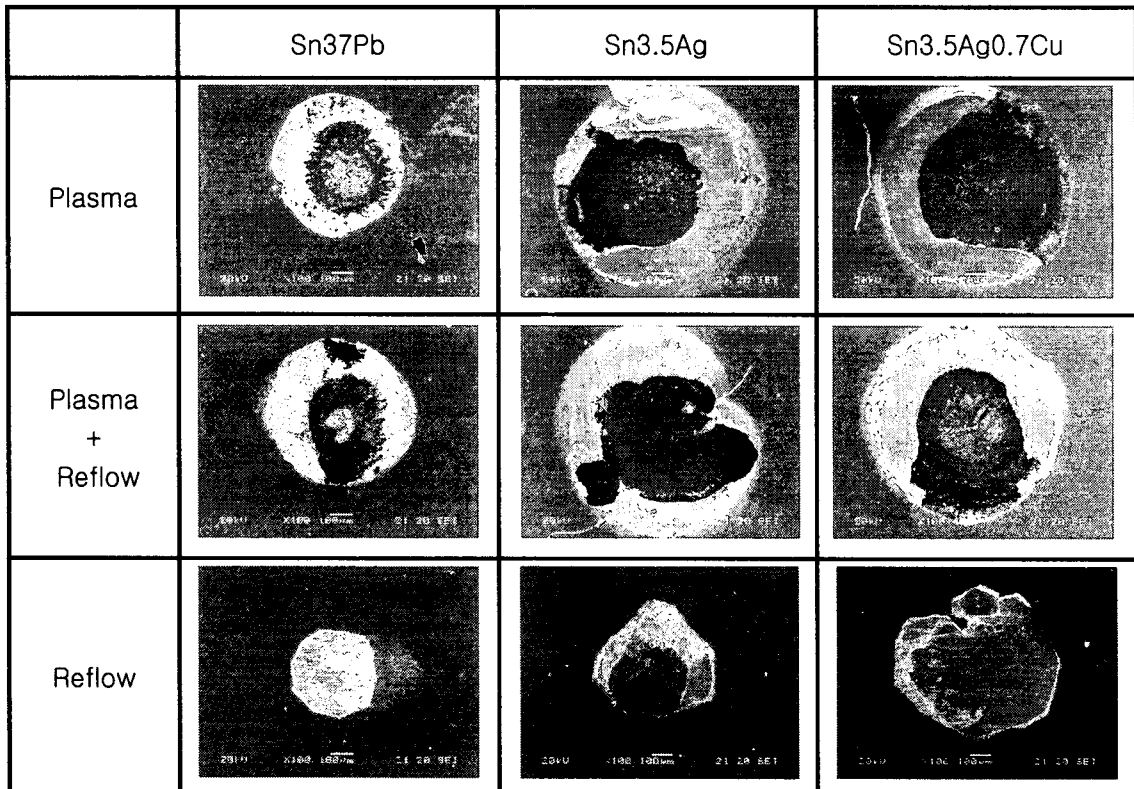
Fracture surfaces of solder bump after shear test (Solder : Sn37Pb, Sn3.5Ag, Sn3.5Ag 0.7Cu).
